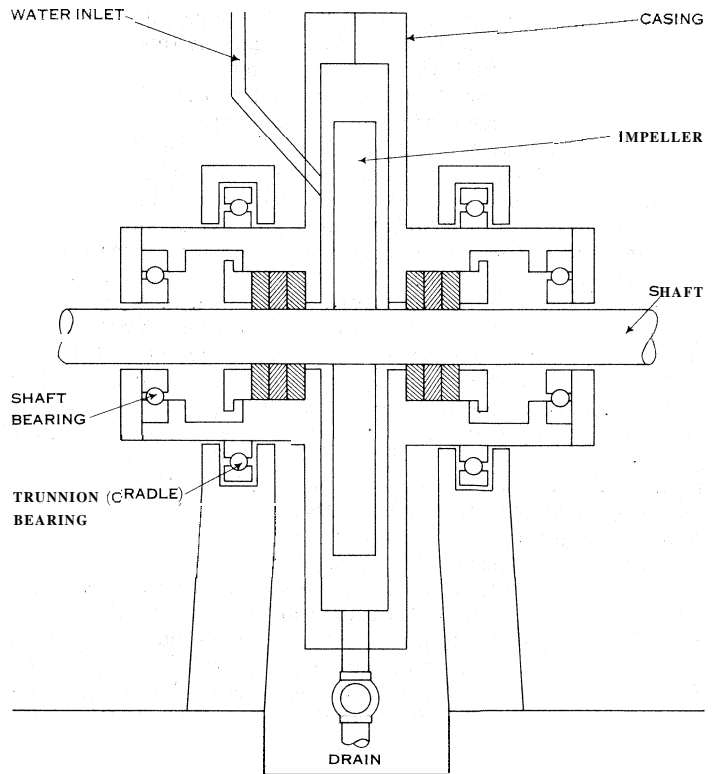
CRADLE-MOUNTED, HYDRAULIC DYNAMOMETER (WATER BRAKE)
